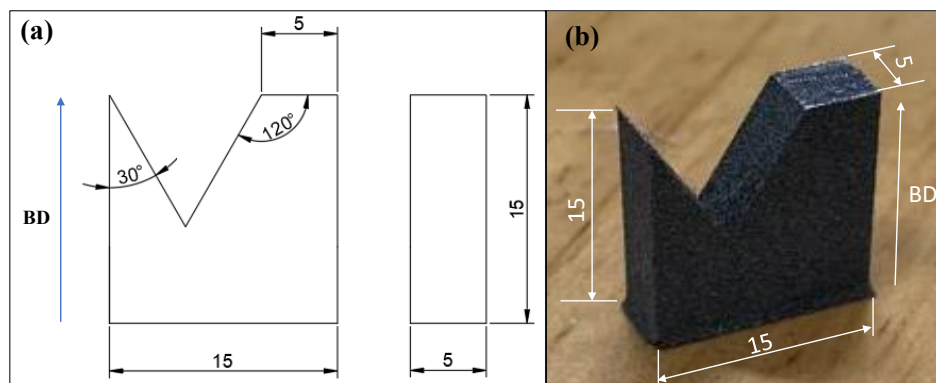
(a) Dimensions (in mm) and build direction of the MAM specimen
